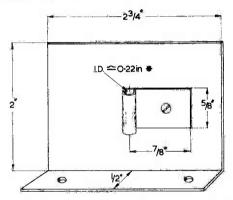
Dimensions of suitable heat sinks for the output transistors. 16 s.w.g. aluminium should be used for the actual sinks and thinner metal for the clips. See text.
